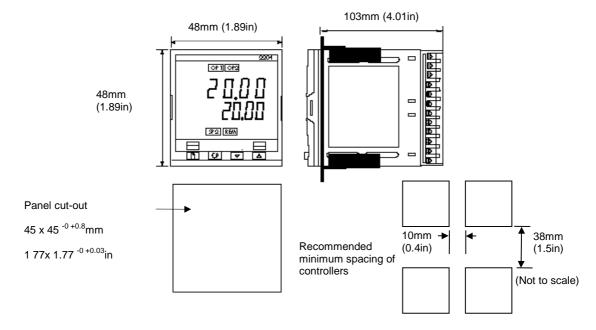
Outline dimensions of Model 2216eFM alarm unit
